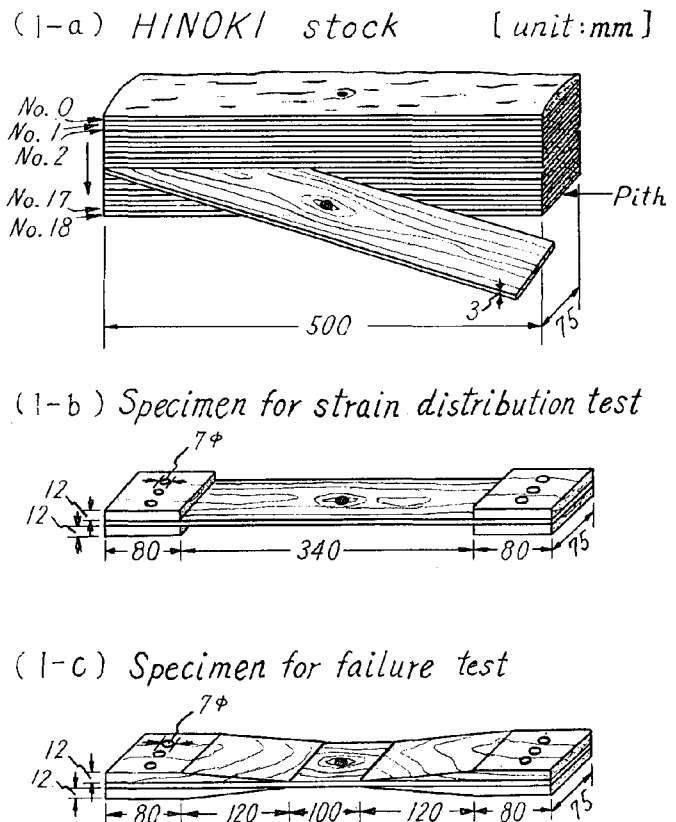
Specimens and HINOKI stock of which knotty thin plates were cut out.
